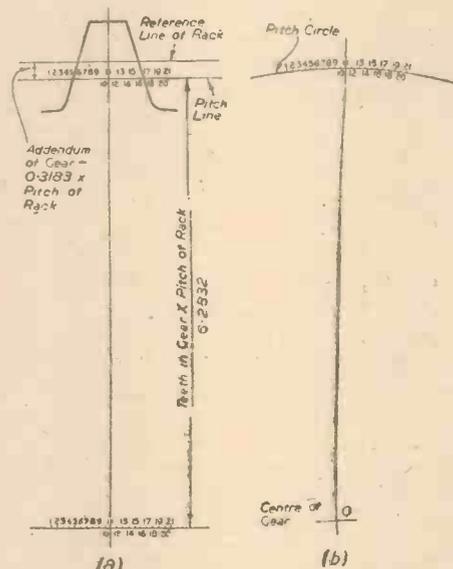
(a) The basic rack shape (b) Tooth form of the gear.
